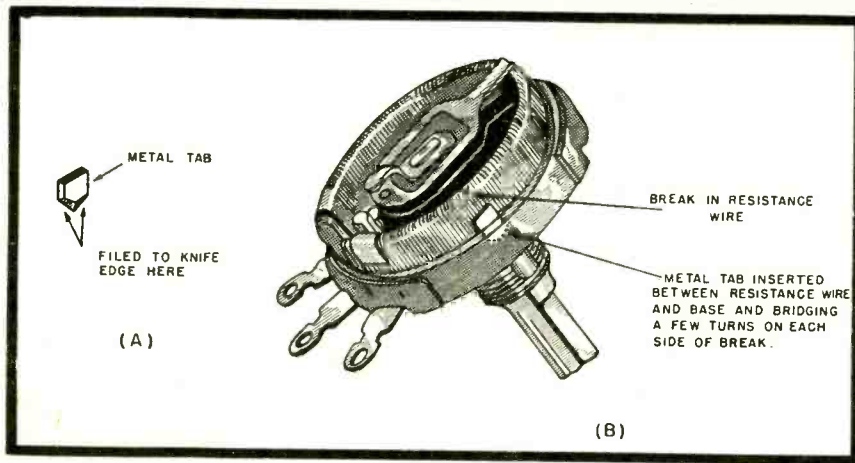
How a small metal tab may be inserted to bridge *open* wire in a wire-wound control. At *A* appears a view of the tab, that can be cut from old tube shields. The lower edge must be cut to a pointed shape and filed almost to a smooth knife edge.
